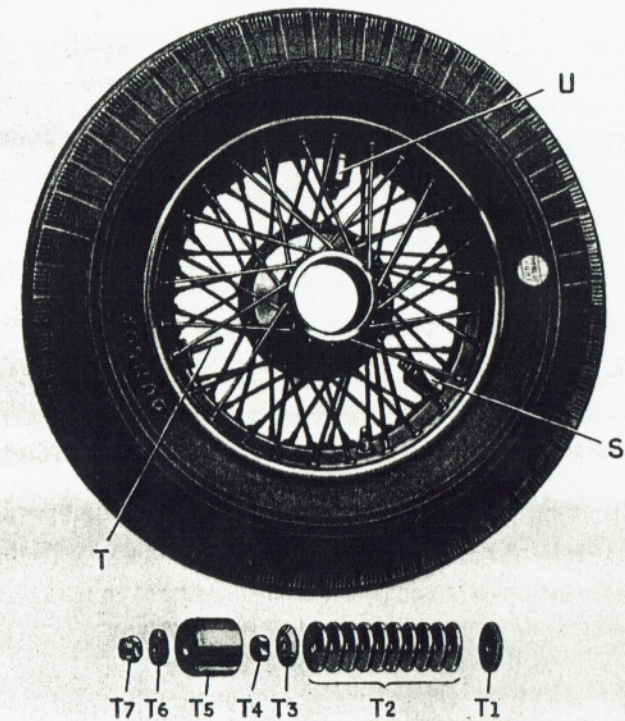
WIRE WHEEL WITH BALANCE WEIGHTS.
